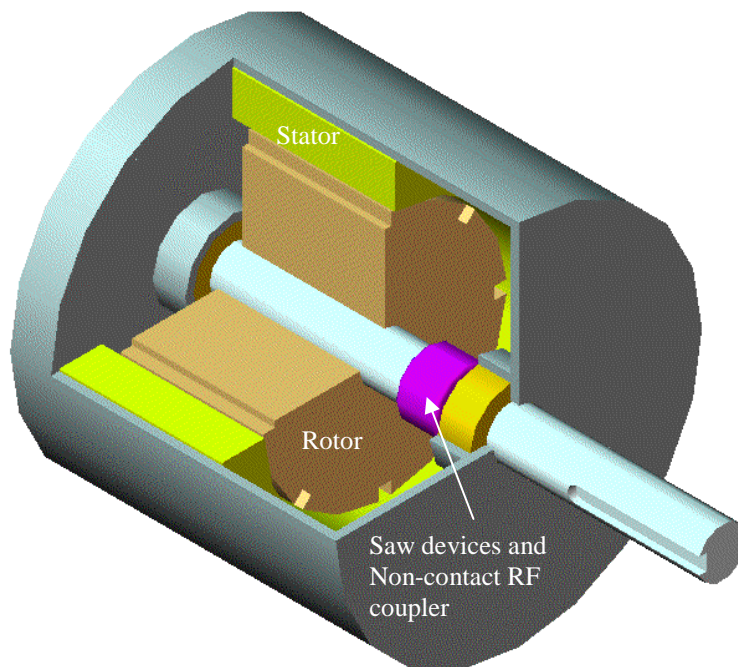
SAW torque sensor inside the prototype PM machine [1].
